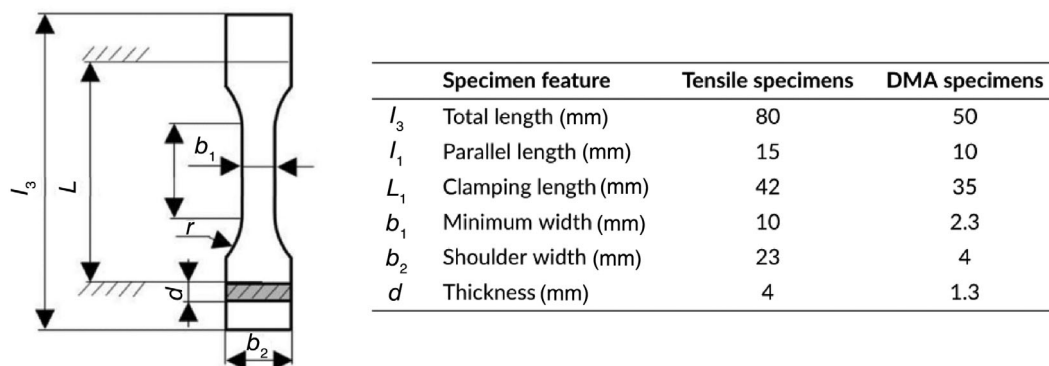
Specimen dimensions for tensile tests and dynamic mechanical analysis (DMA)
